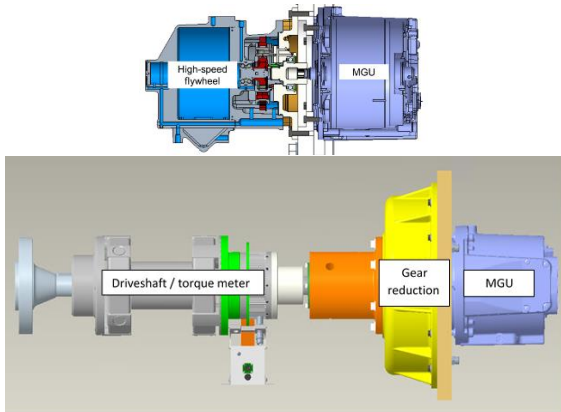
TOP – HSFW-MGU MODULE BOTTOM – HSFW-ENGINE FRONT DRIVELINE
